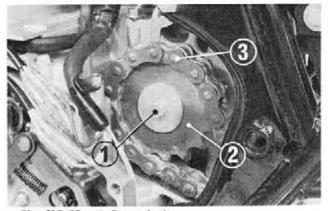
(1) 8 mm bolt ② Drive sprocket ③ Drive chain
